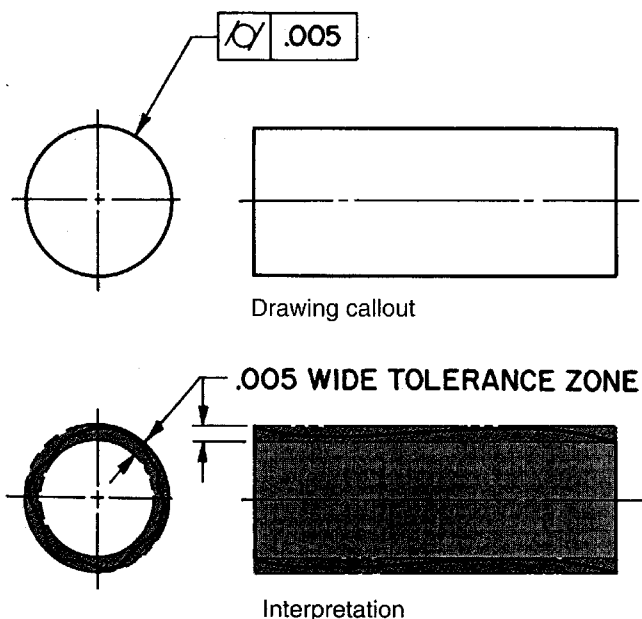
The cylindricity geometric tolerance establishes a tolerance zone that controls the diameter of a cylinder throughout its entire length.
